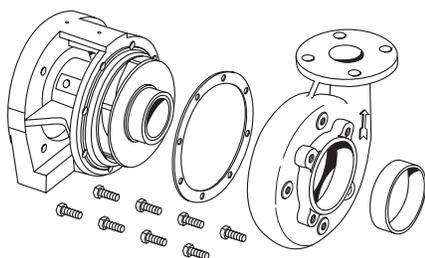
2520 Casing, Gasket, and Wear Ring Removed.
